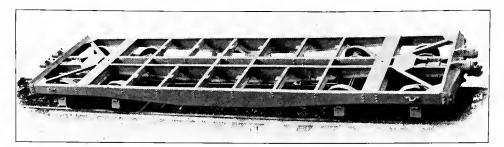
Pressed Steel Underframe for 50-Ton Capacity Box Car. Builder, Pressed Steel Car Company.
